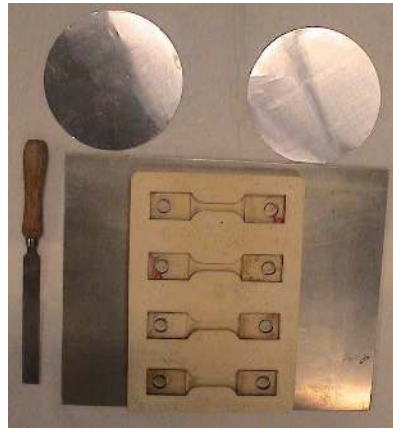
File, aluminium foils, rubber mould and steel plate used in the DTT specimen fabrication
